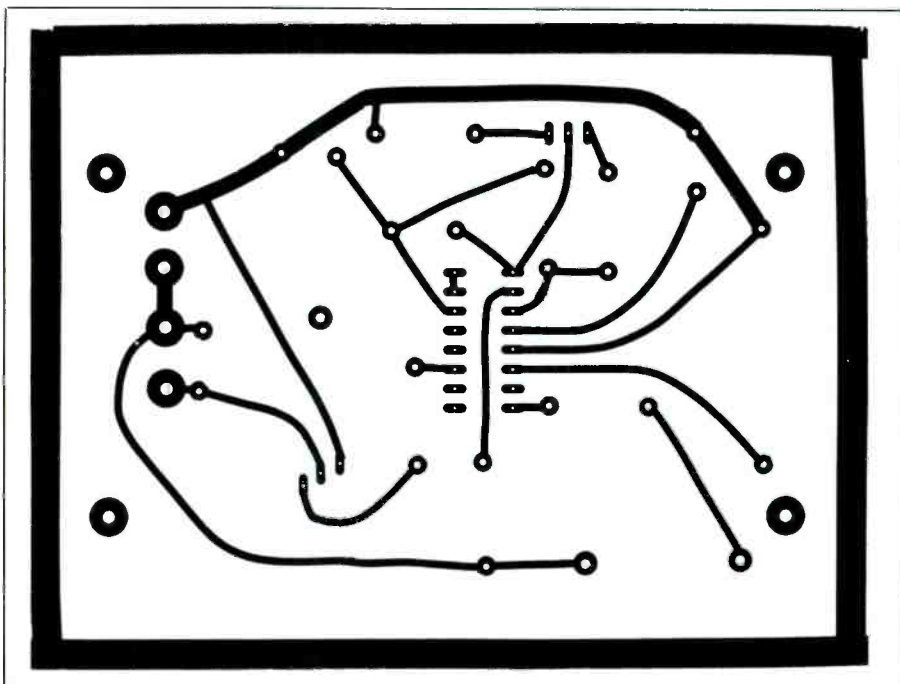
Actual-size etching-and-drilling guide for printed-circuit board.
